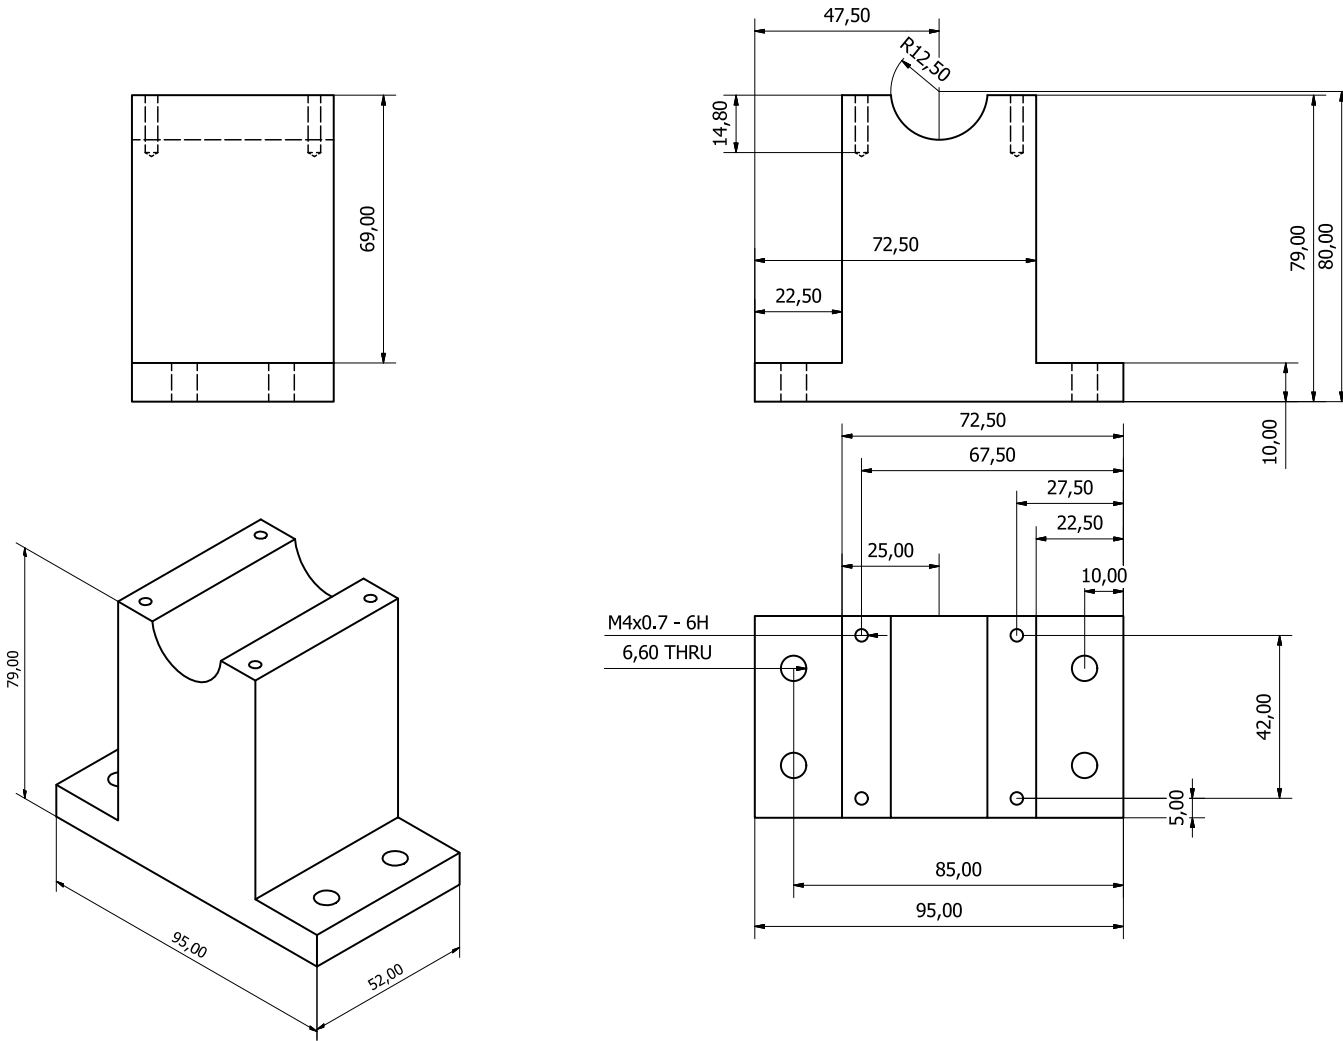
Technical drawing of the NIR laser mount. Material: aluminium.
